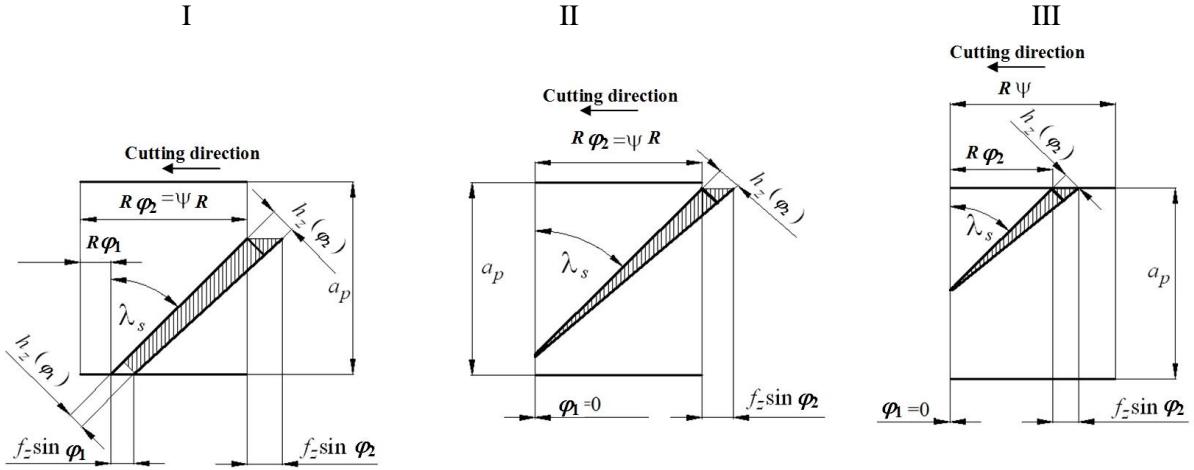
Developed view of the contact area between the tool and work piece during milling
